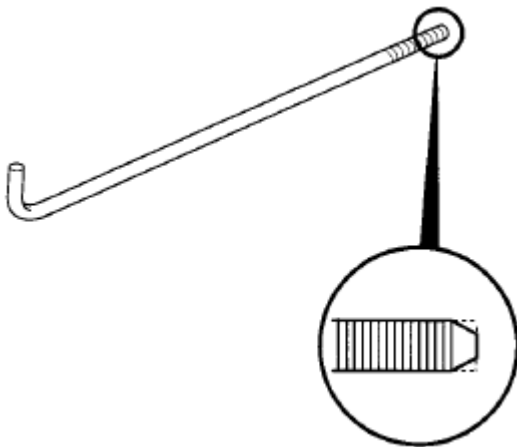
Removing One Of Battery Clamp Bolts From Battery Tray
